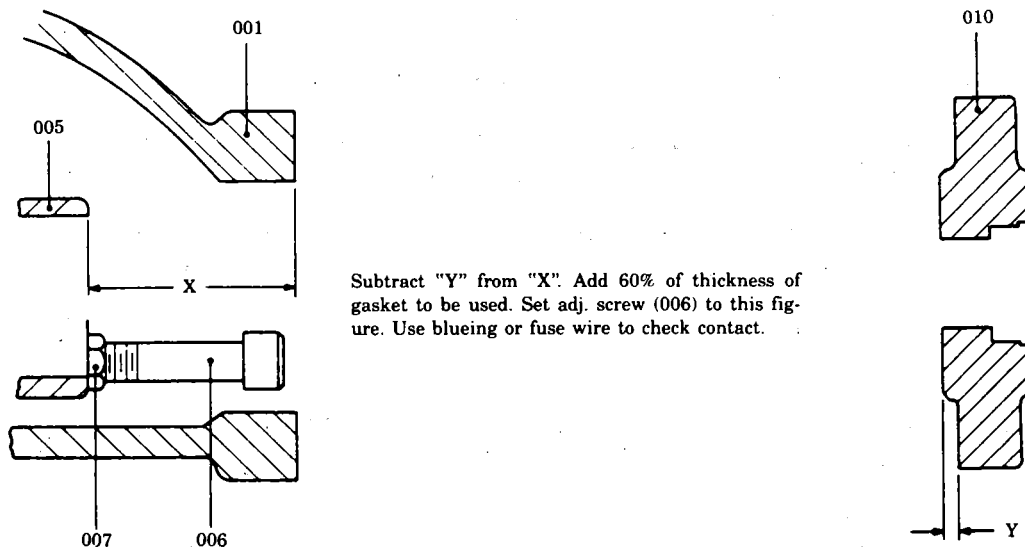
SETTING OF HOUSING ADJUSTING CAPSCREWS
